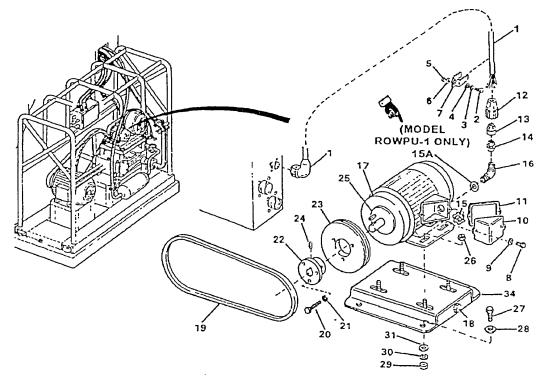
Air Compressor Motor (sheet 1 of 2) Components
